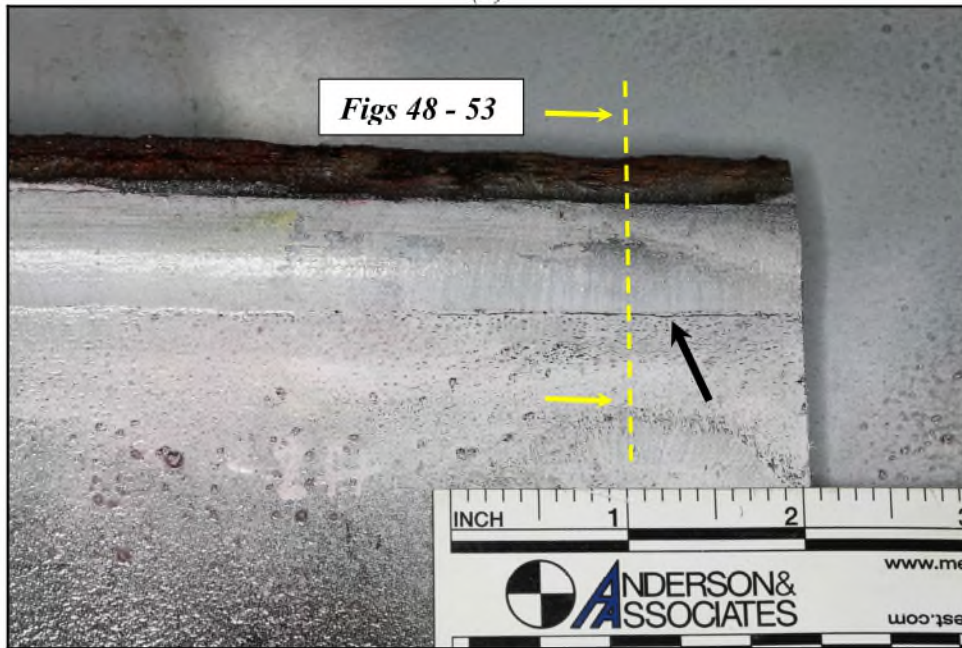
Photograph showing the rupture after grit blasting and secondary NDE examination. The panel encompassing the rupture to be removed is marked.
